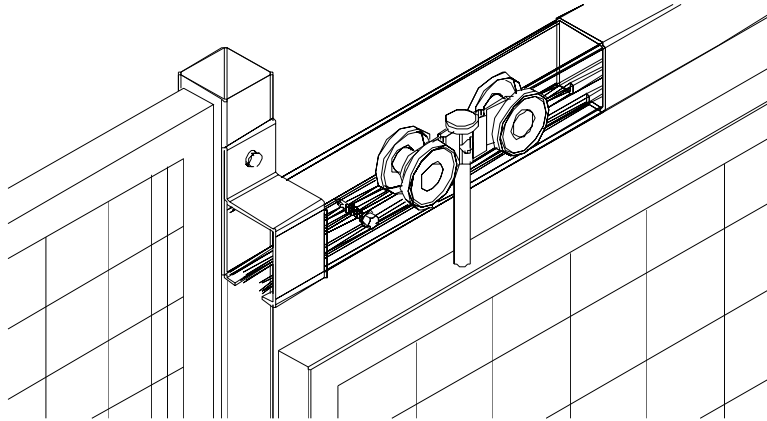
SLIDING DOOR - DOOR INTO TRACK ASSEMBLY
